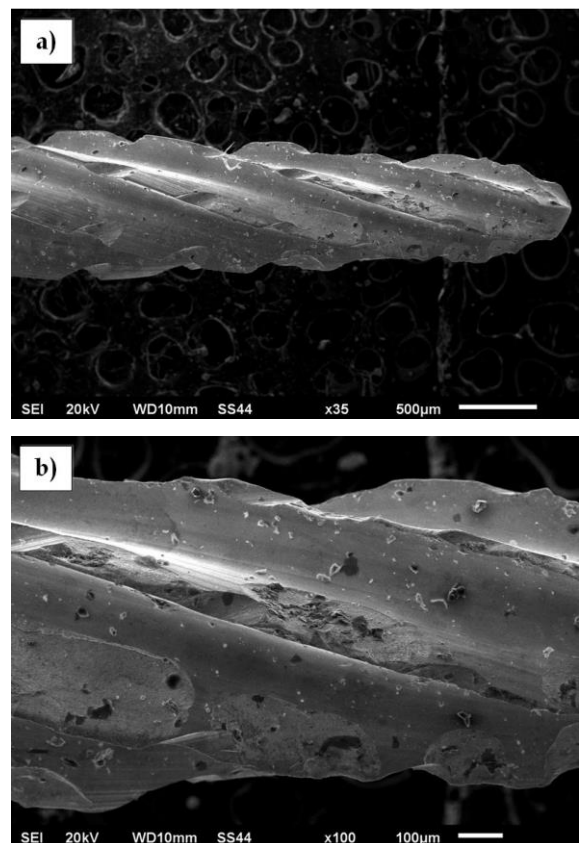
WC-Co dental bur after use: bur head (the cutting edge)
